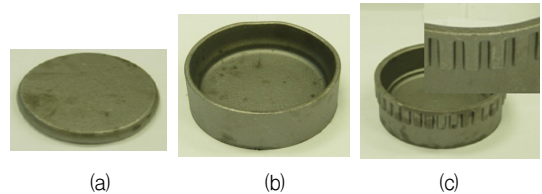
Deformed shape of the Case-4: (a) upsetting, (b) blocker and (c) finisher
